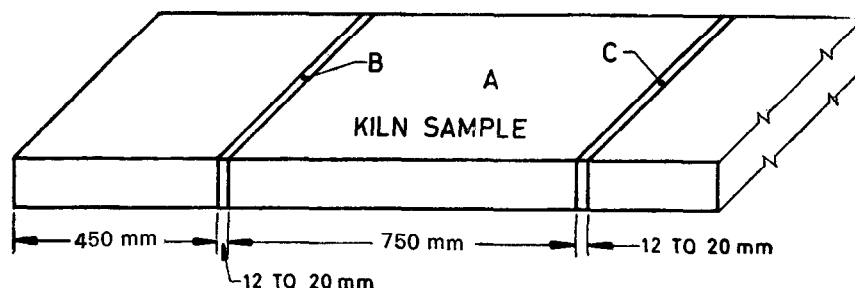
METHOD OF CUTTING ORIGINAL MOISTURE CONTENT SECTIONS AND KILN SAMPLE FROM TIMBER TO BE KILN DRIED
